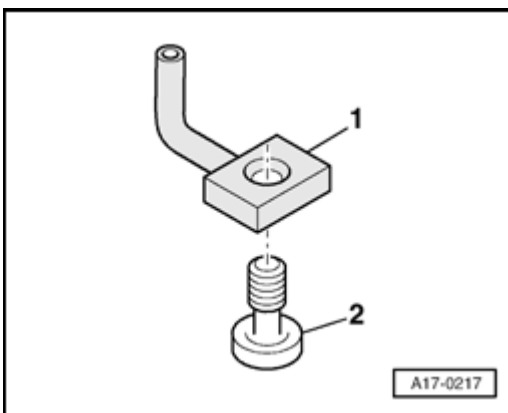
Oil Spray Jet And Pressure Relief Valve
